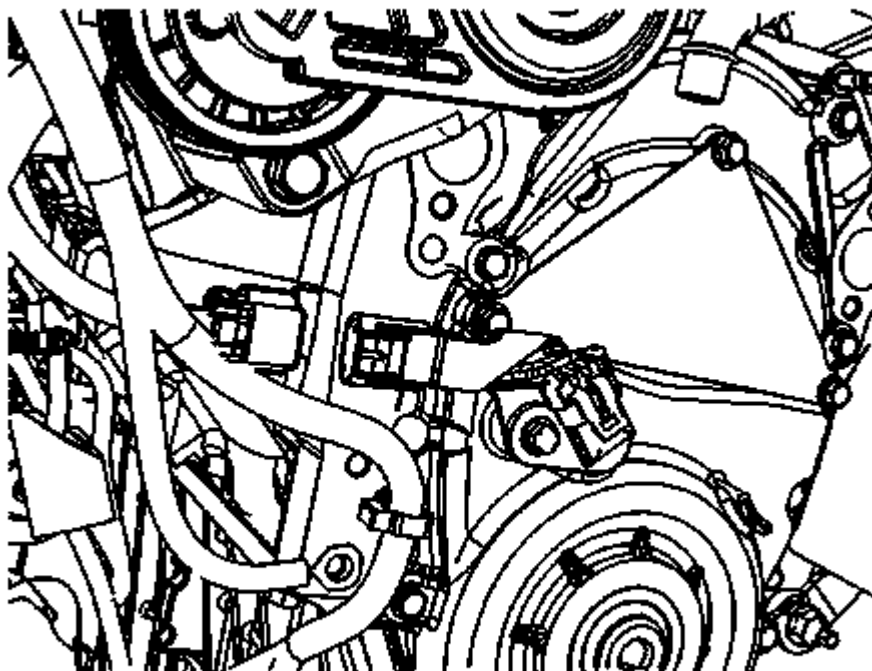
Identifying Camshaft Position (CMP) Sensor Wiring Harness Jumper
